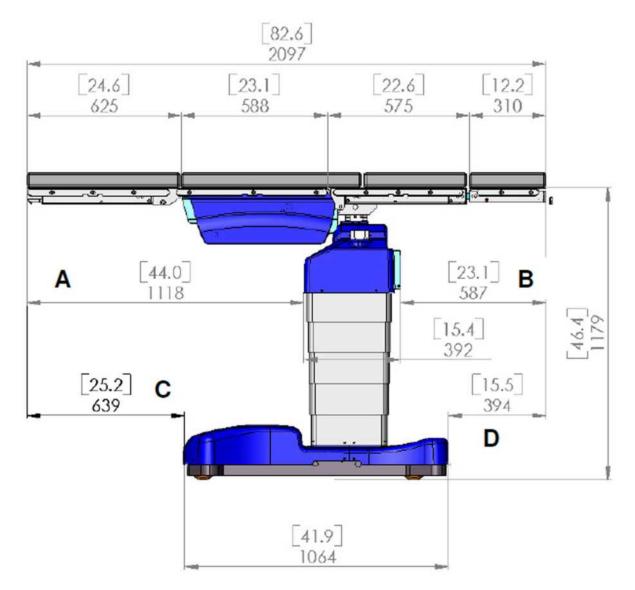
Dimensions displayed based on: D850 one-piece long leg plate, kidney elevator, and one-piece back plate (max. slide at foot end).
